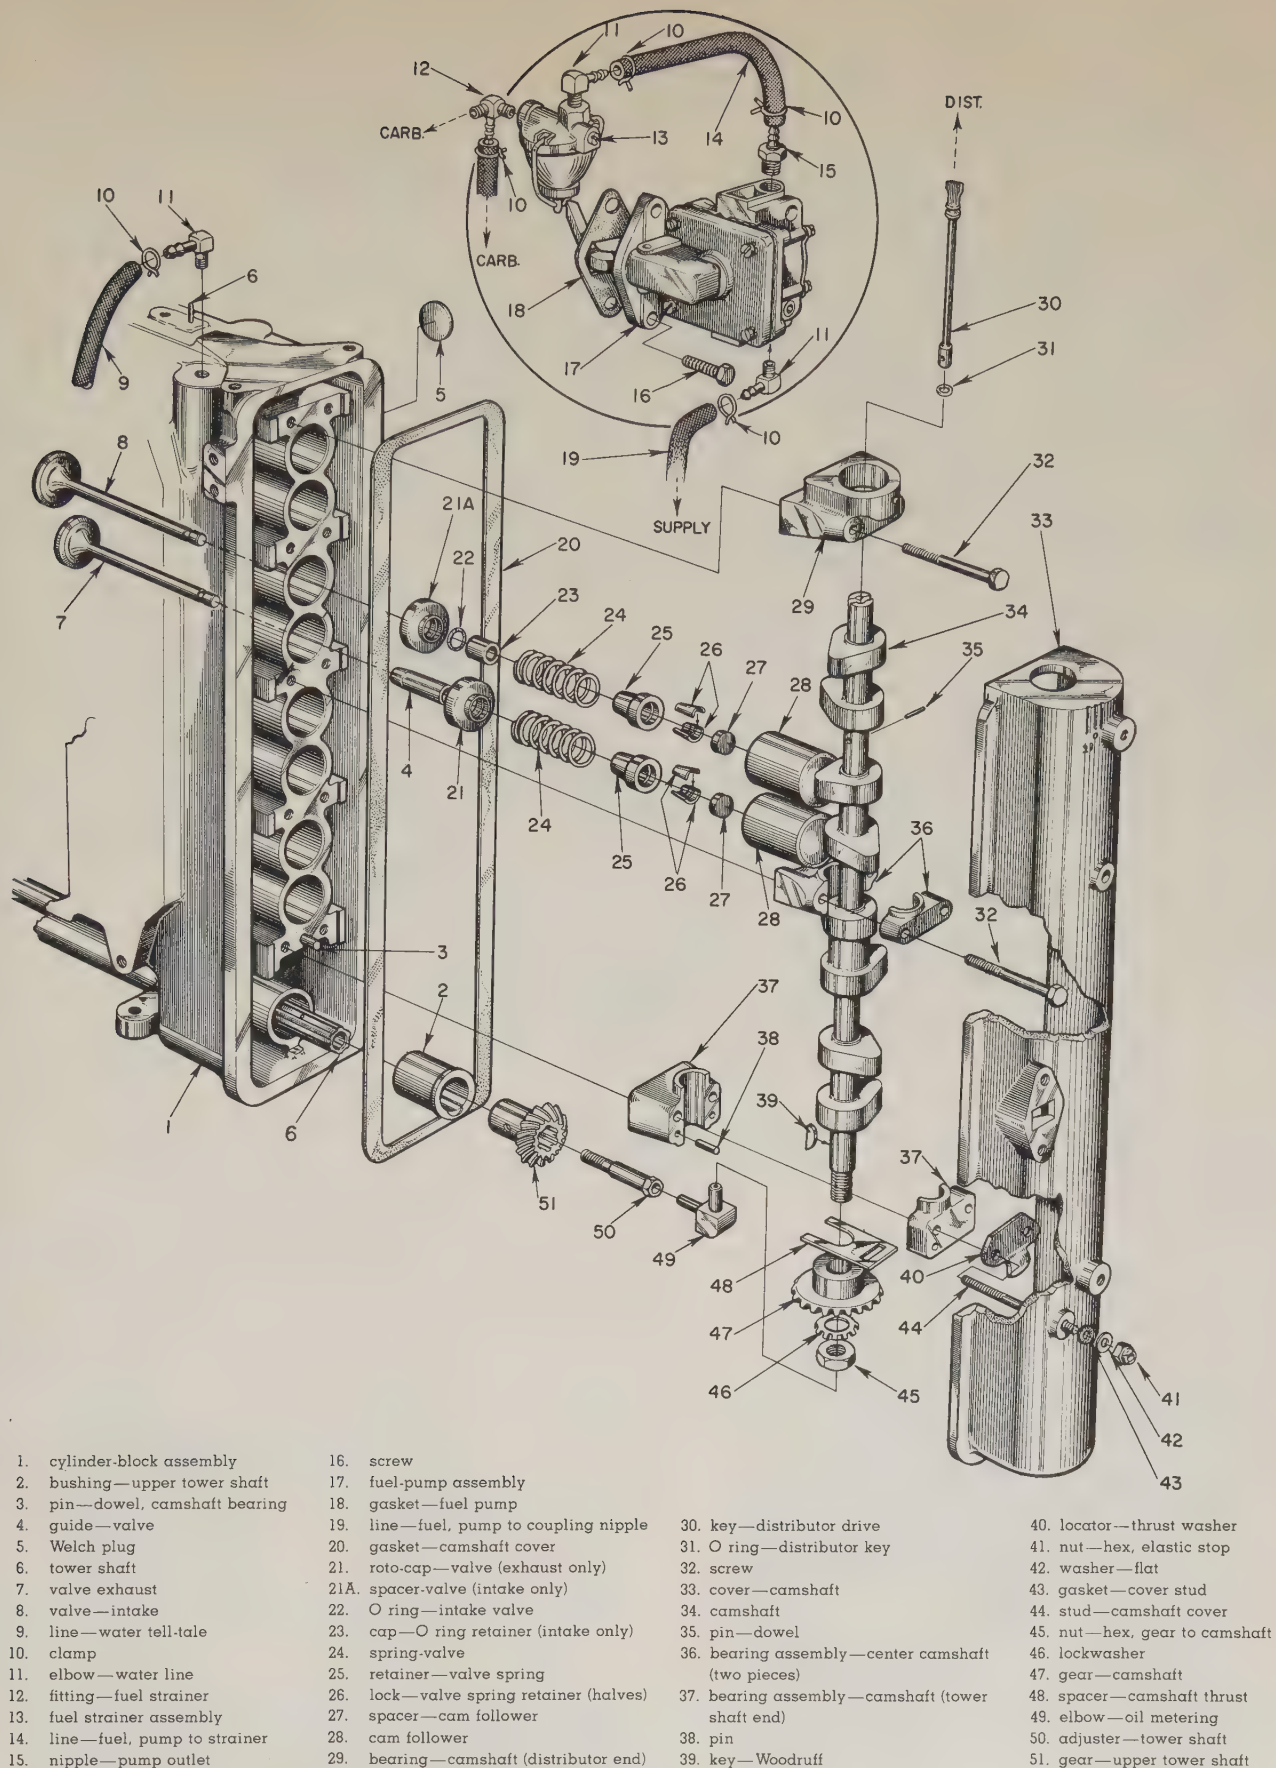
Partly disassembled view of engine showing fuel pump, camshaft, valves, and related parts. (Homelite Division of Textron, Inc.)
